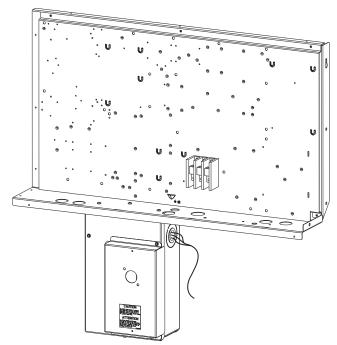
Location of HACR Circuit Breaker Enclosure
